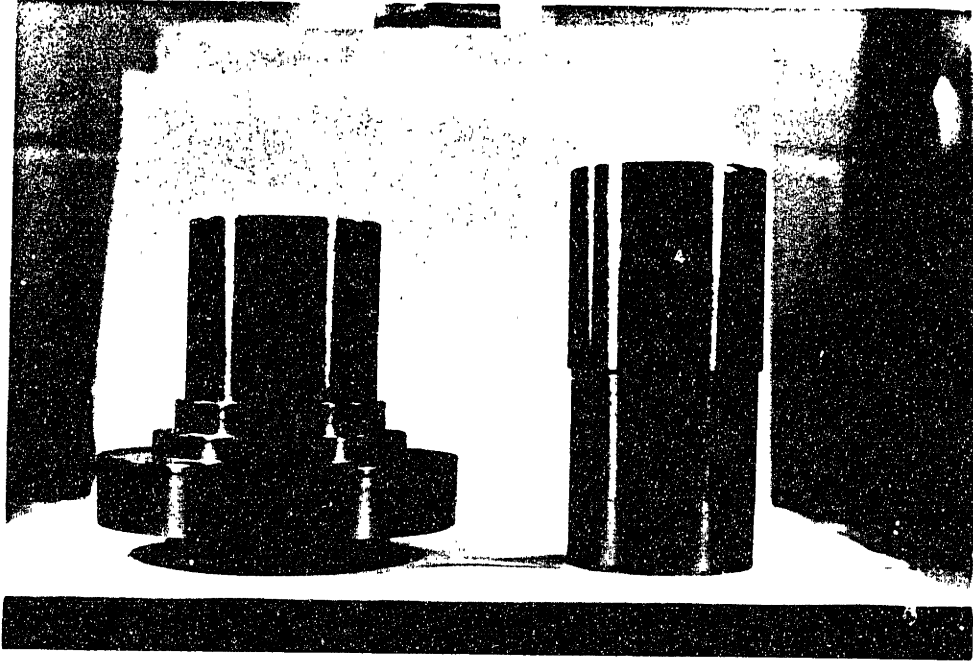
Steel Sleeves for Bearing Mounting and Power Transmission
